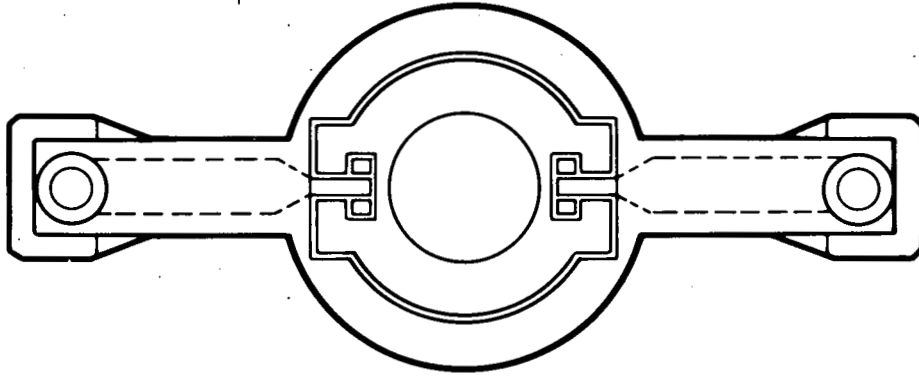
B3-19. *Adaptor for Fuel Assemblies Incorporating Extension Rods
